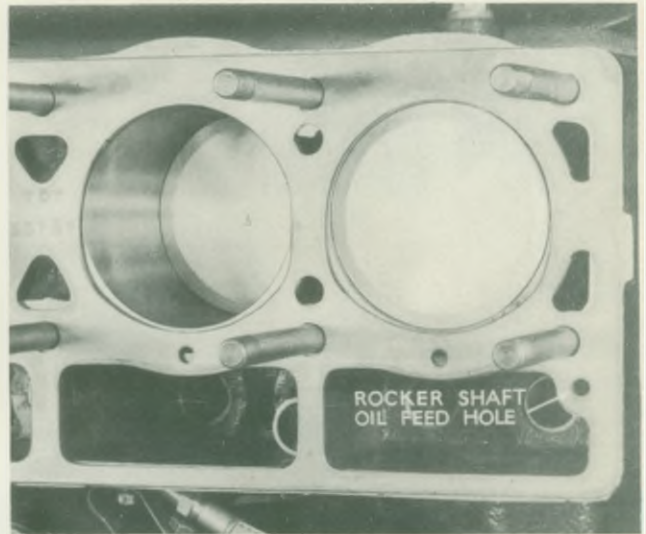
Showing the correct fitting position for the cylinder head gasket (Eng. Nos. V.1—V.29707E)
